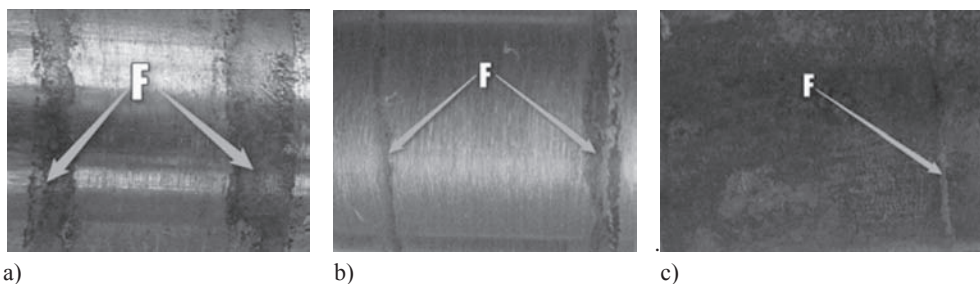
Shaft surface after the tear and wear test, surf. about 10X, letter F marks the spot of fretting wear: a) only milled shaft, b) roller shaft, c) surface hardened shaft
